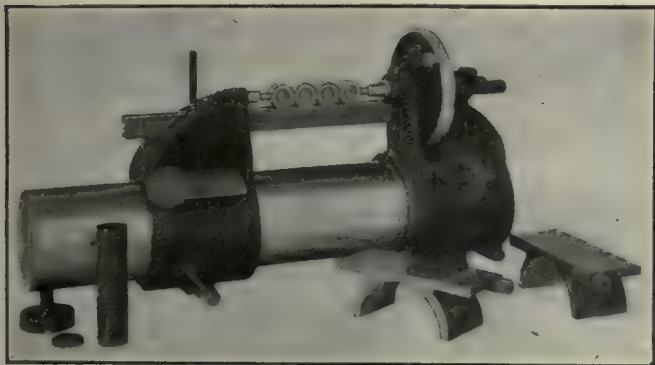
OPERATING CARRIAGE ON LANDIS ROLL GRINDING MACHINE
